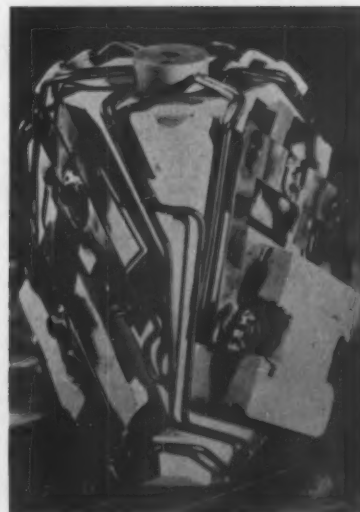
Internal core of inner gimbal showing internal tube arrangement.
